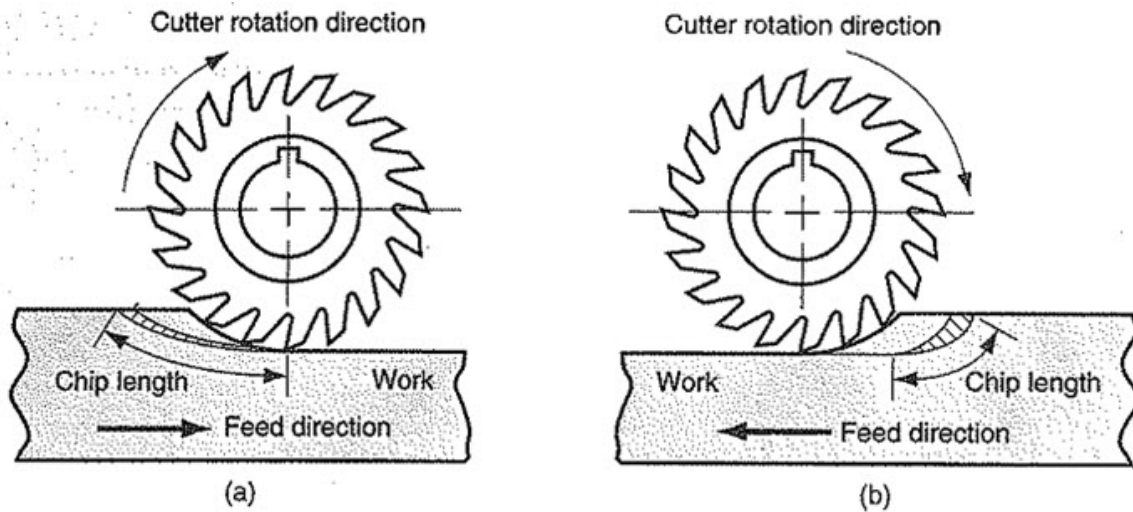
Two forms of milling with a 20-tooth cutter: (a) up milling, and (b) down milling.
